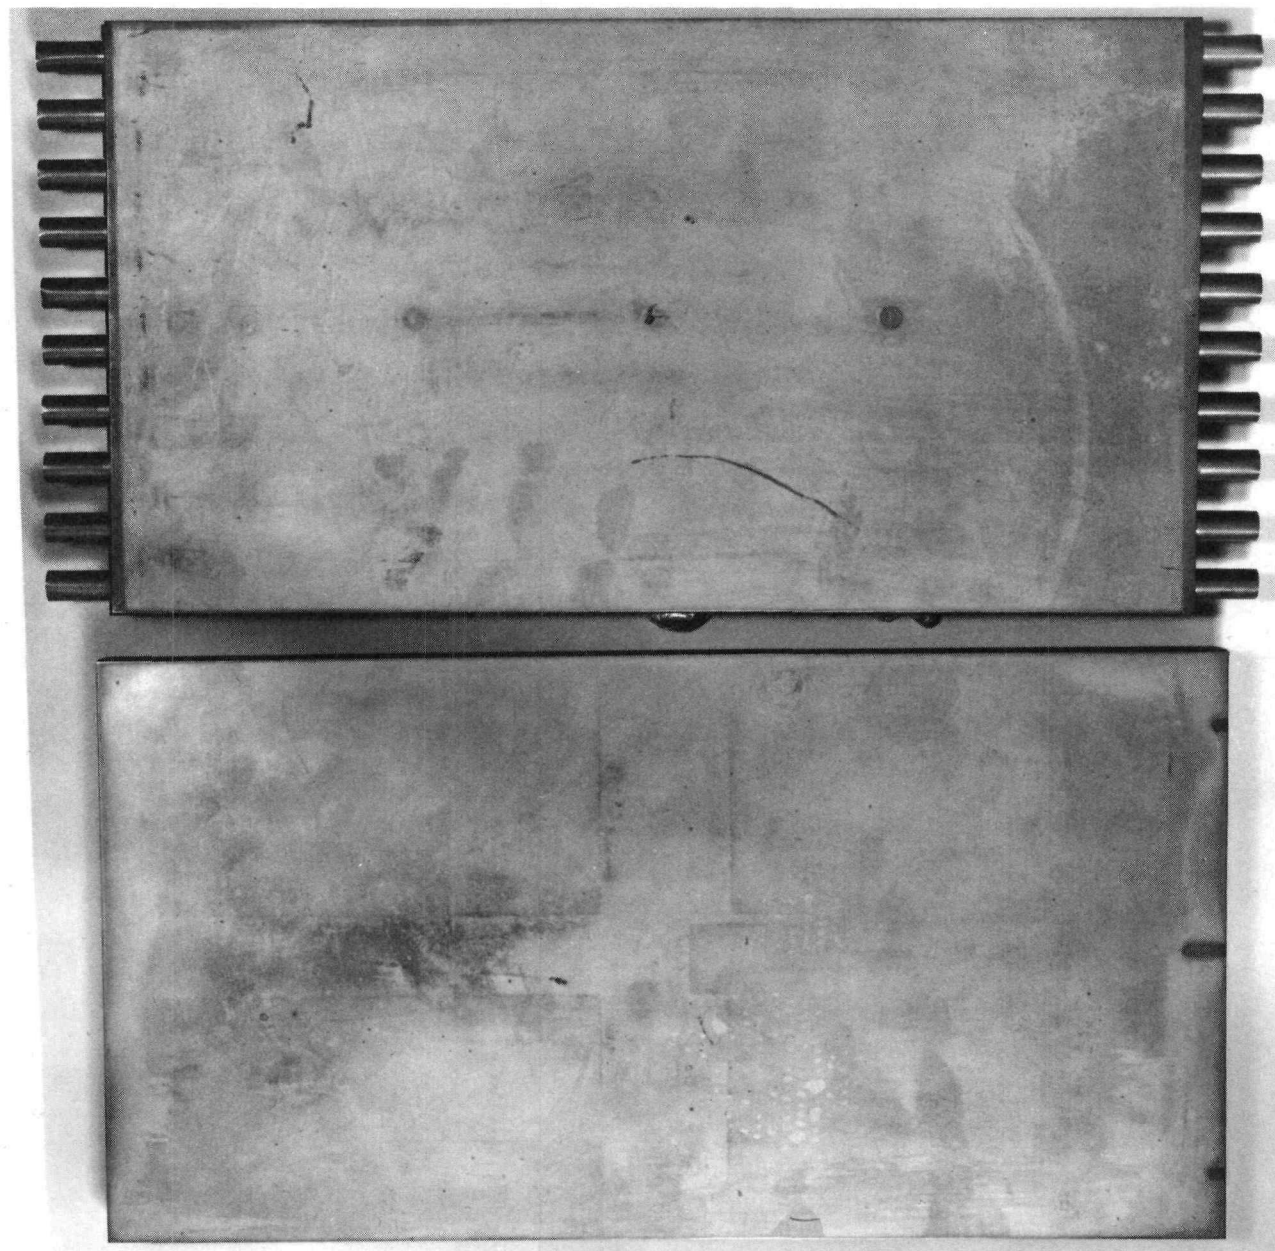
BRAZED HOT PLATE AND HEAT SINK AFTER ATTEMPT TO DUPLICATE CRACKING
